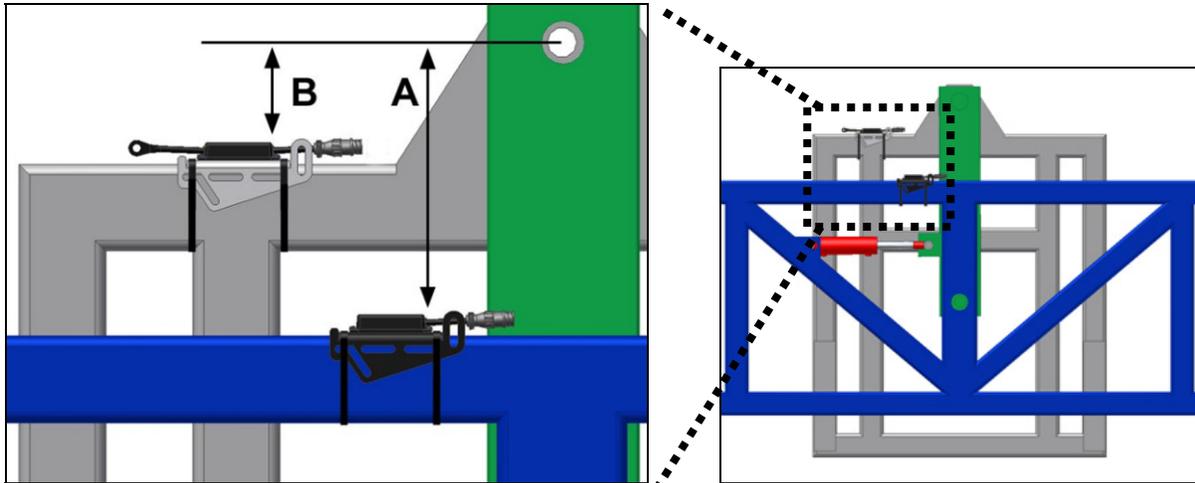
Roll Sensor Mounting on a High Pendulum Boom
